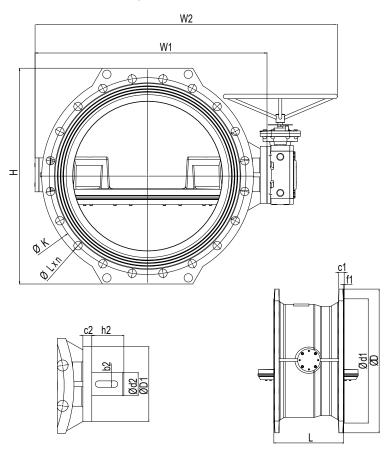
Sectional drawing PN 16 DN 100 - 800
